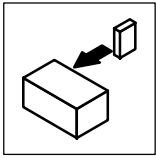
Dimensions 8215 - 8218: Standard assembly
